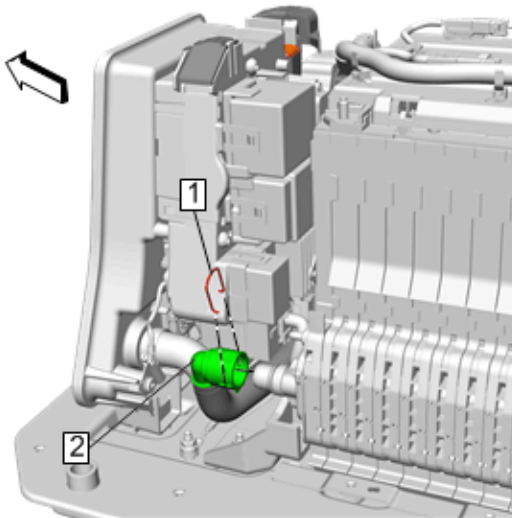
High Voltage Battery Cooling Manifold Outlet Hose And Retainer
